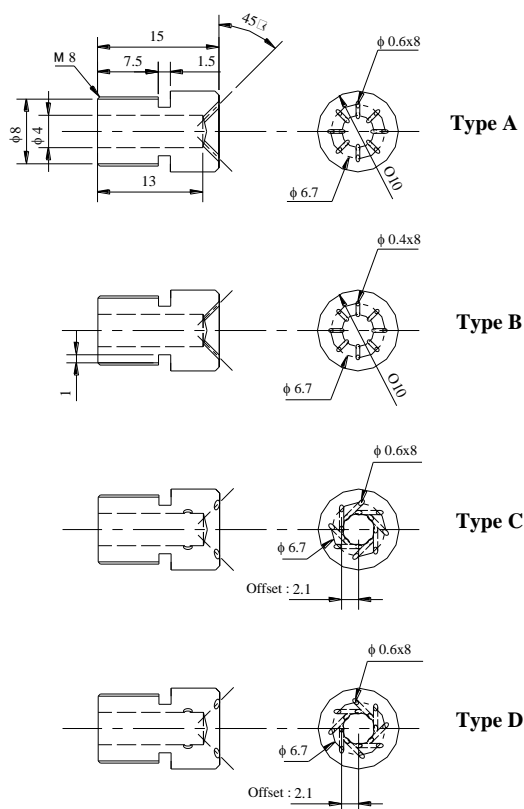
Designing parameters and dimensions of secondary fuel injectors
